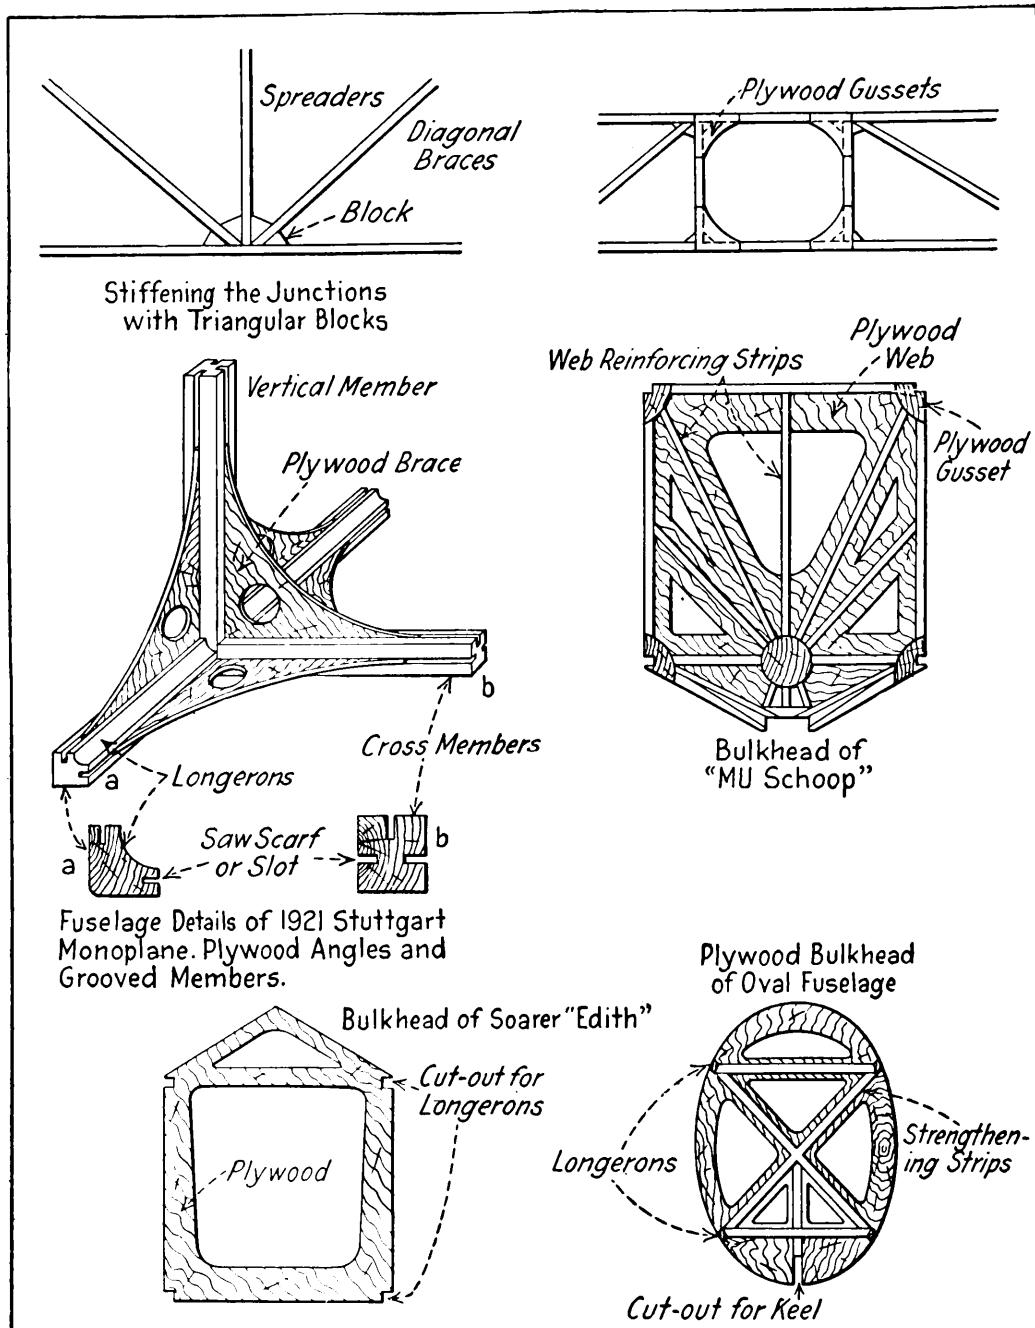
Some Structural Details of German Sailplane Fuselages. Note Method of Reenforcing Light Plywood Bulkheads by Reenforcing Strips of Wood Attached to the Face, also Method of Strengthening Fuselage with Plywood Angles Fitting Saw Slots Cut in Longerons and Spreaders in Which They Are Secured with Glue.
